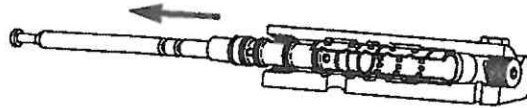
Insert tool in second row of holes in sleeve and if necessary, pry out with screwdriver.
